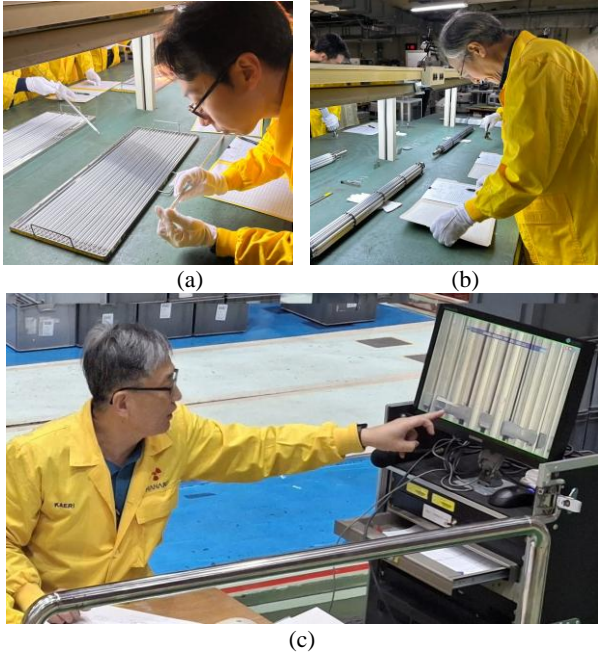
Defect inspection (a) Fuel rods (b) Fuel assemblies (c) Spent fuel.
